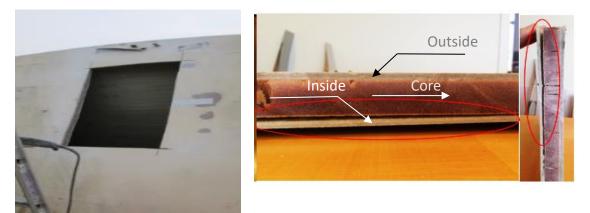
Cut-out from the Trailing edge (max chord area) of the SSP34m blade tested at Blaest. The damage was confirmed while the size of the damage had been increased.
